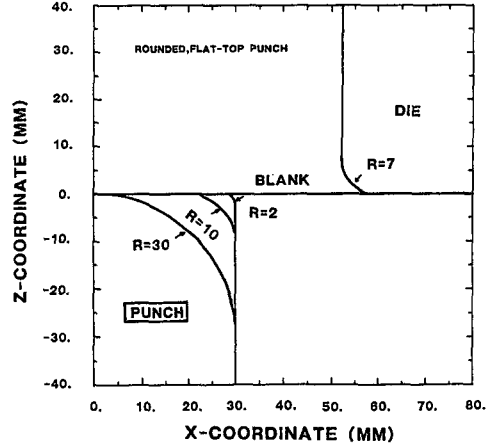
Tooling geometry for simulation strip section in the rounded flat-top punch forming process
